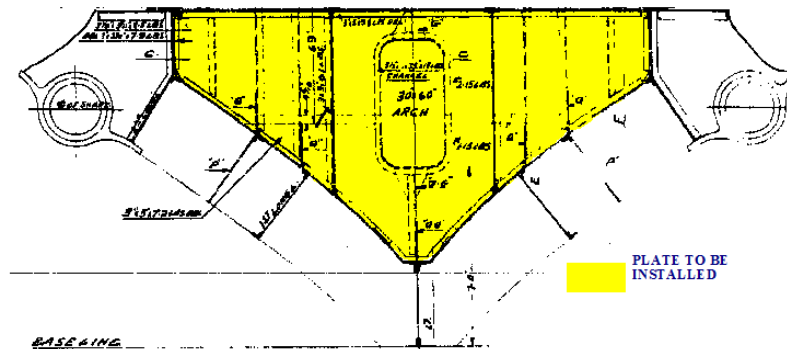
Aft Bulkhead in Aft Emergency Diesel Generator Room at Frame #120, Showing Plate Replacement
